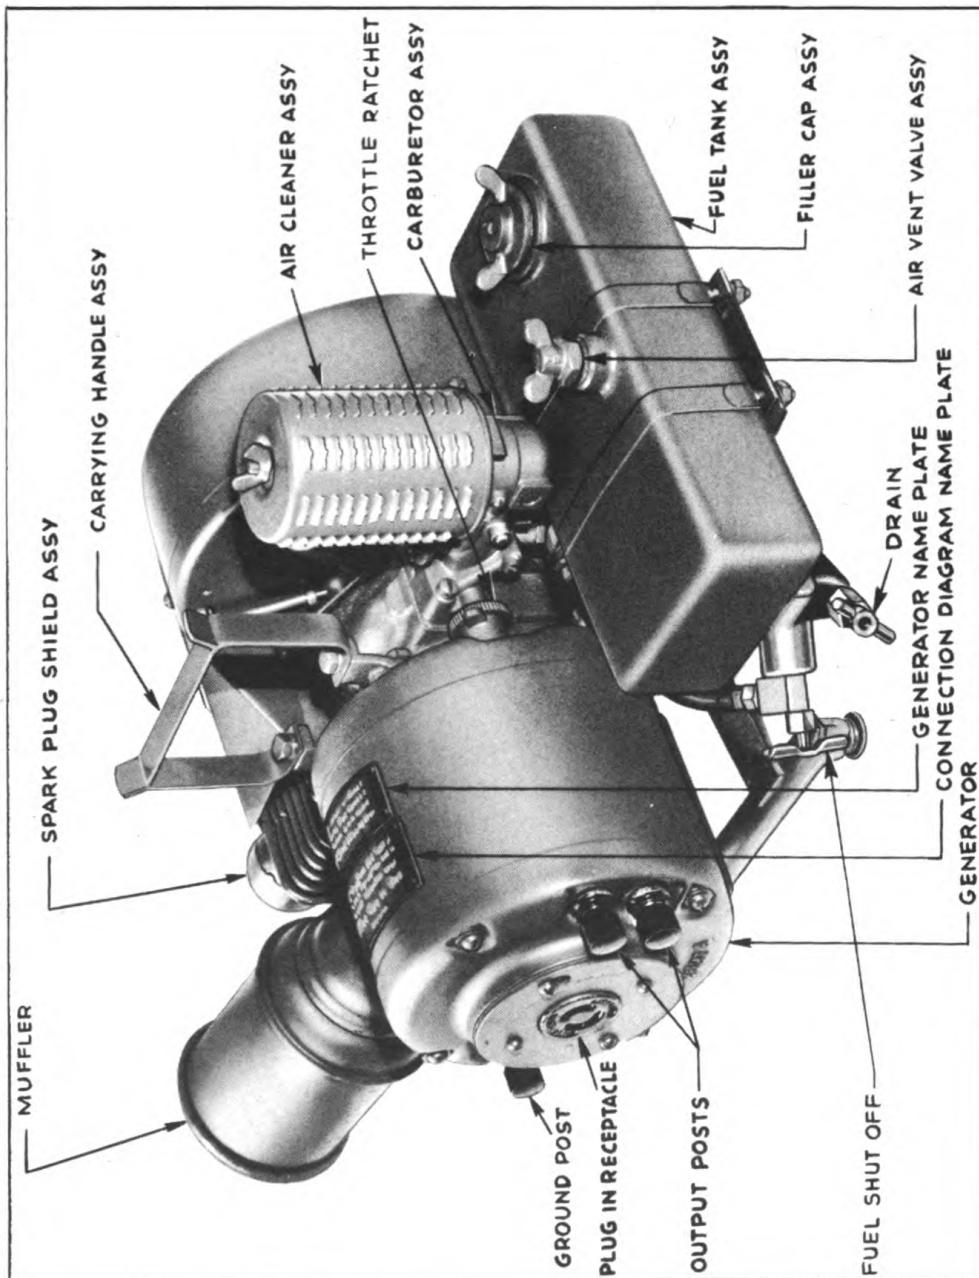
POWER UNIT PE-214-A—REAR VIEW
